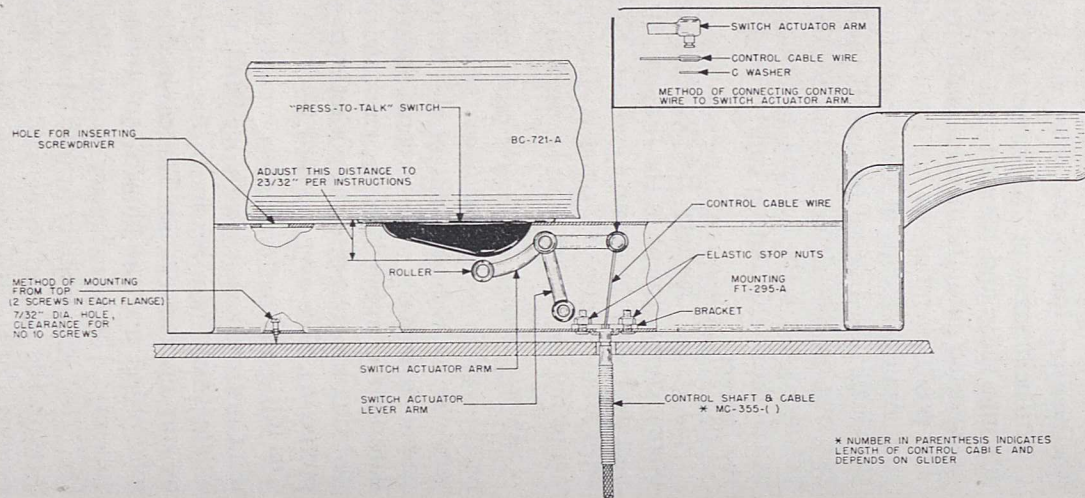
CONTROL SHAFT MC-365 INSTALLATION—SHOWN IN END FASTENED POSITION
